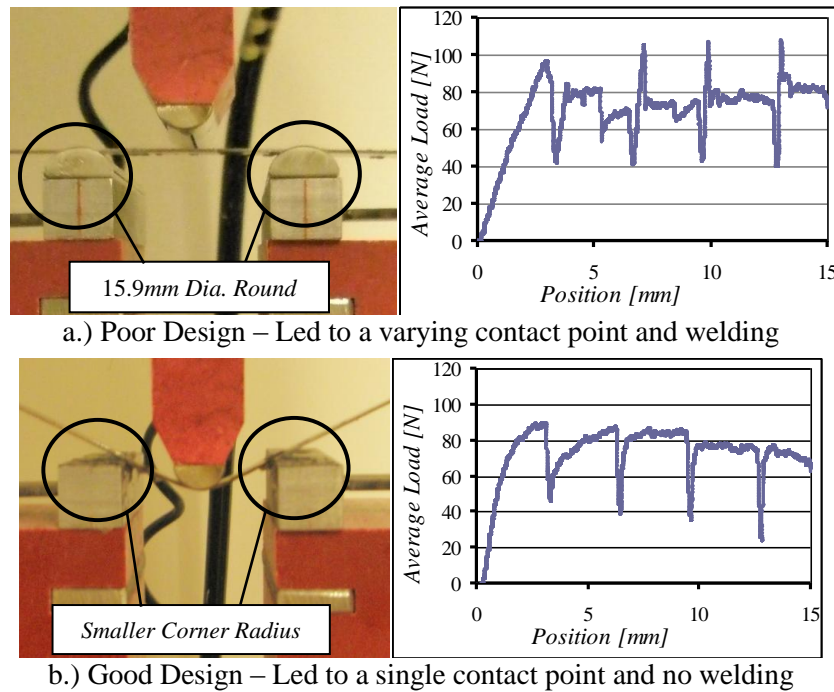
Bending die design variants [89]-[90]. A bending die with rounded edges allowed for tiny micro-welds to form as deformation and electrical application took place. This caused steep spikes in the mechanical load profile. This was alleviated by using sharp edges.
